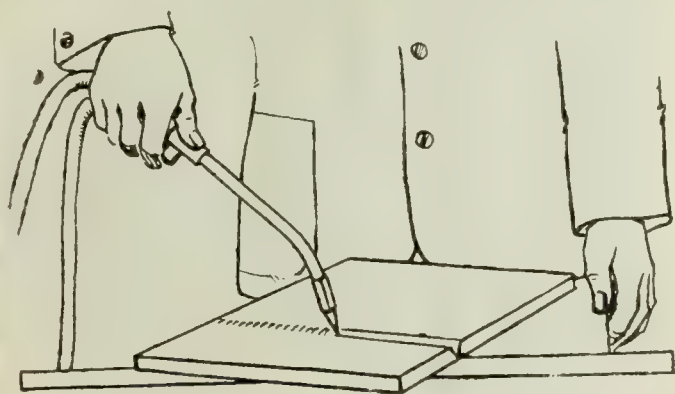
CORRECT METHOD OF HOLDING THE WELDING BLOWPIPE.
